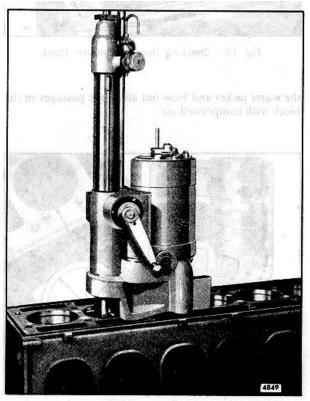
Boring Cylinder Block with Portable Boring Bar
